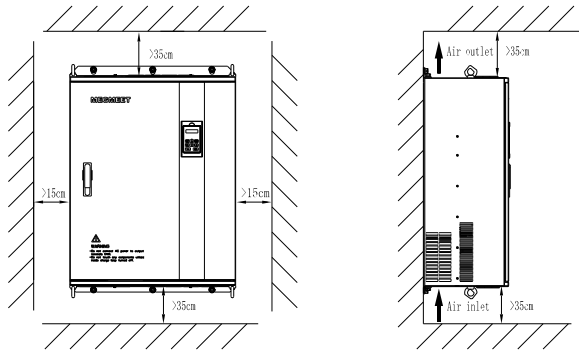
Installation spacing for models of 55kW/75kW and above
